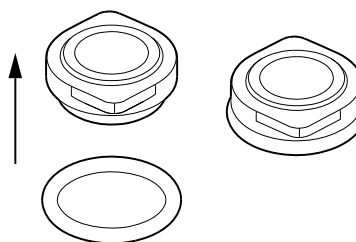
Fitting the O-ring on the stationary shaft seal part
